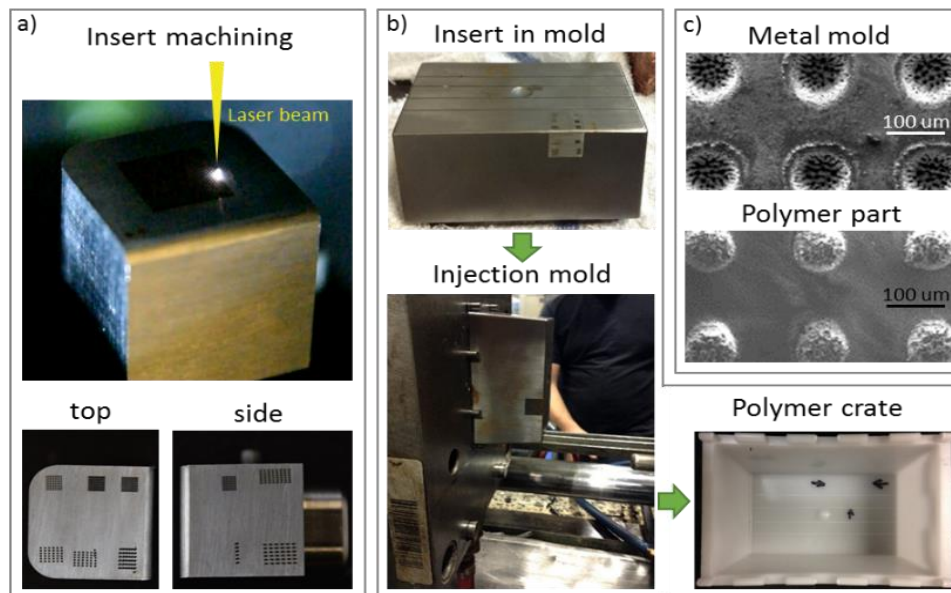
Illustration of a) P20 steel insert laser-machining, b) industrial injection molding process, c) SEM images of metal mold and polymer part.
